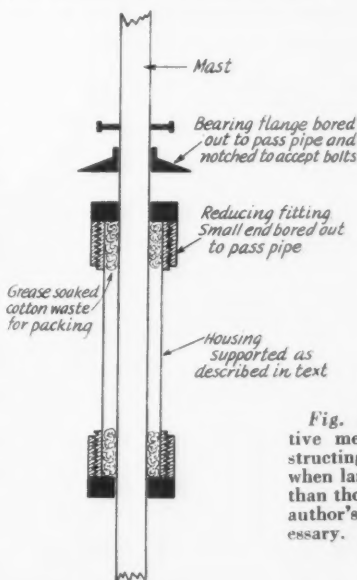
Alternative method of constructing the housing when larger pipe sizes than those used in the author's beam are necessary.
